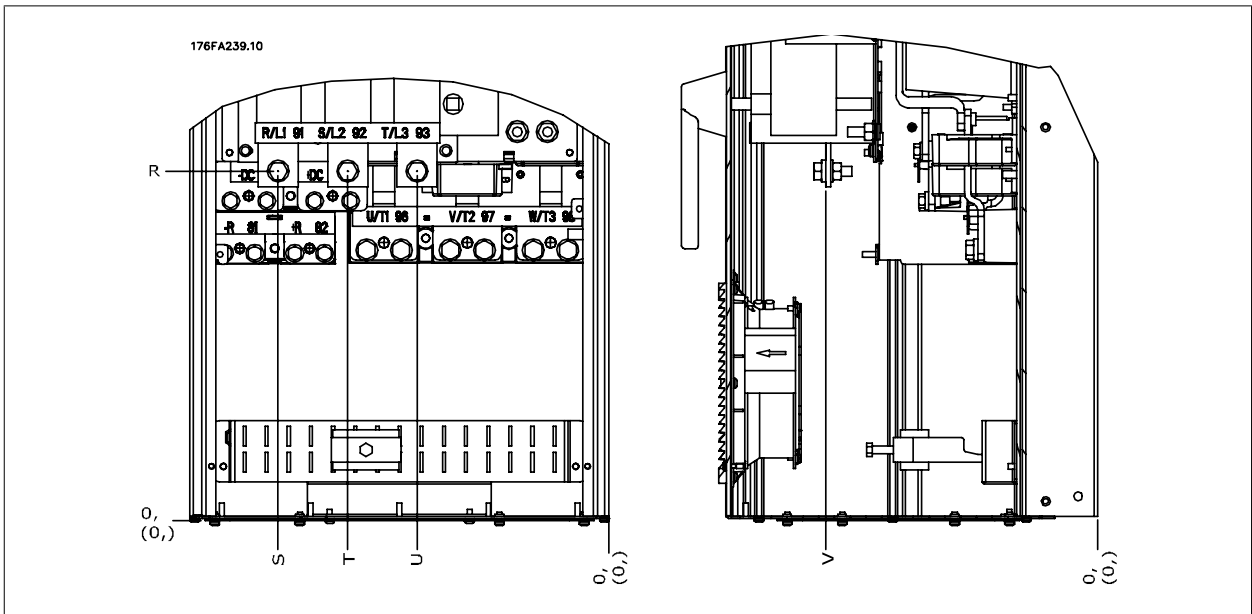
Position of power connections with disconnect switch, frame size D1 and D2
